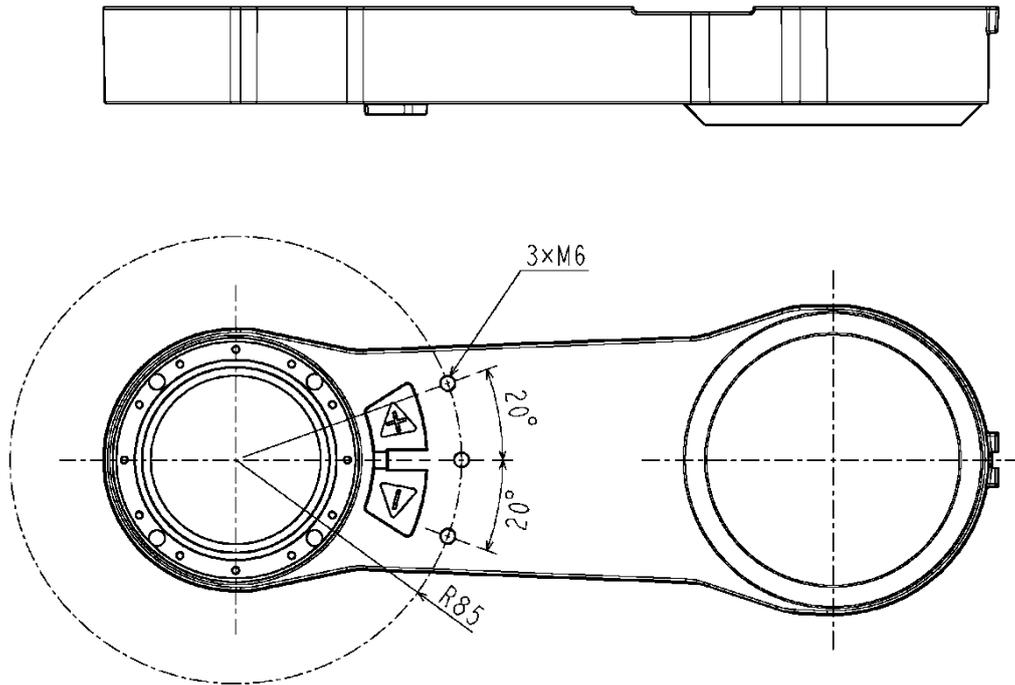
Mounting position of axis-2 mechanical stopper
